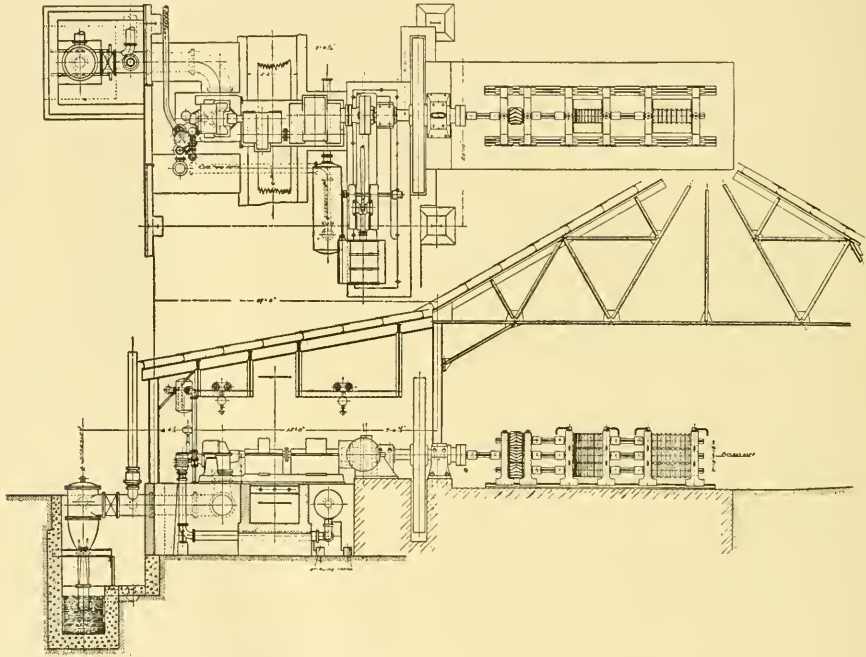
STEAM TURBINE ROLLING MILL INSTALLATION
